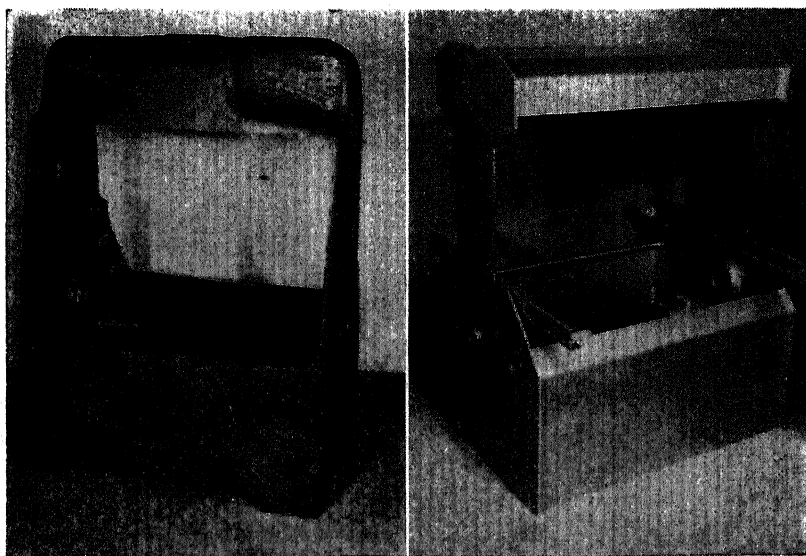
Changeover of the frame of this bread-slicing machine from casting to welded steel saved 60 sq. in. floor space, reduced weight 30%, increased accuracy of bearing alignment, saved 30% in manufacturing cost and improved sales.
